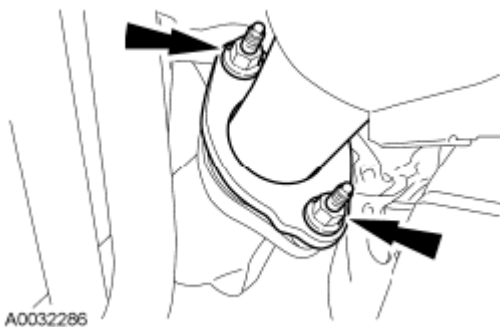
Locating Exhaust Manifold-To-Front Pipe Nuts
